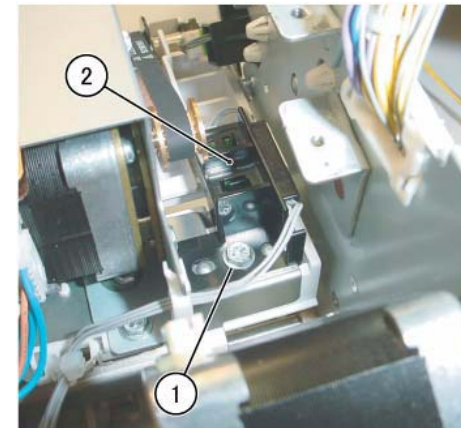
Removing the Front Tamper Home Sensor Assembly (j0fa42286)
